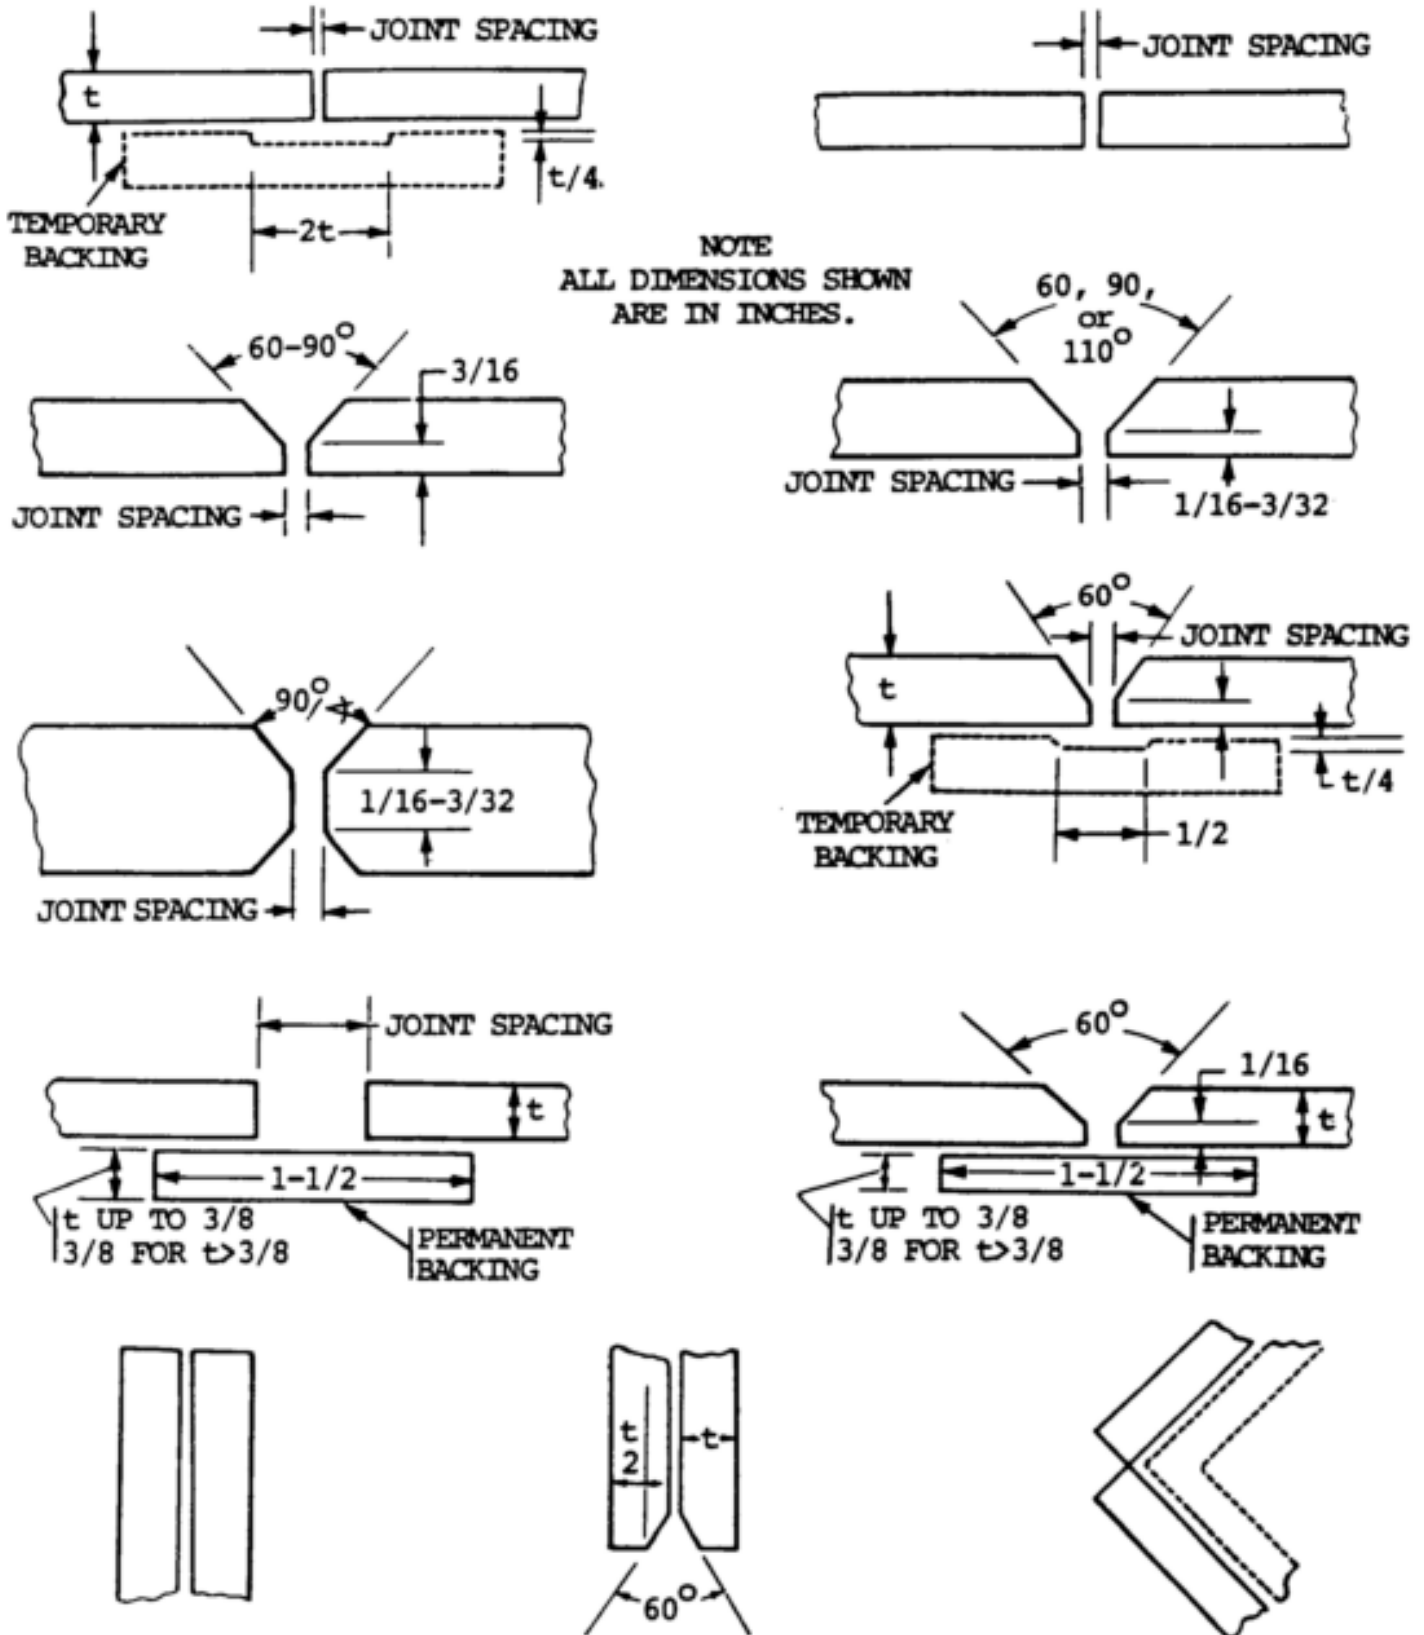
Aluminum joint designs for gas metal-arc welding processes.
